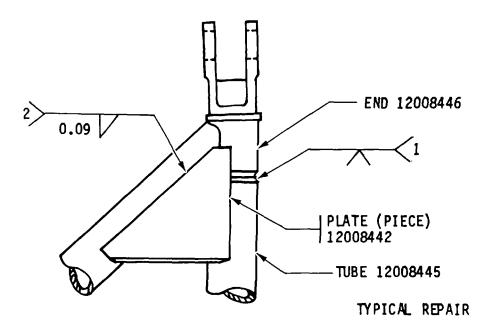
Repair welding procedure for tube 12008445 to end 12008446.
